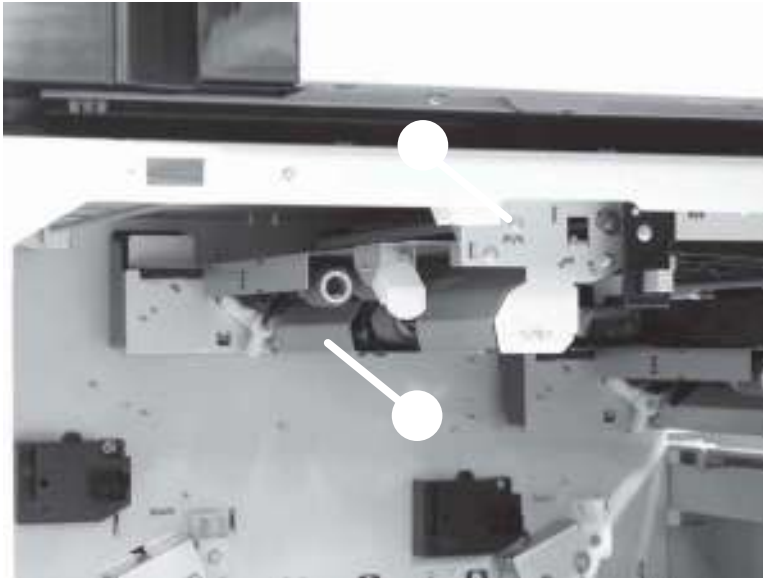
Remove the HCI left tray pickup assembly (1 of 2)
